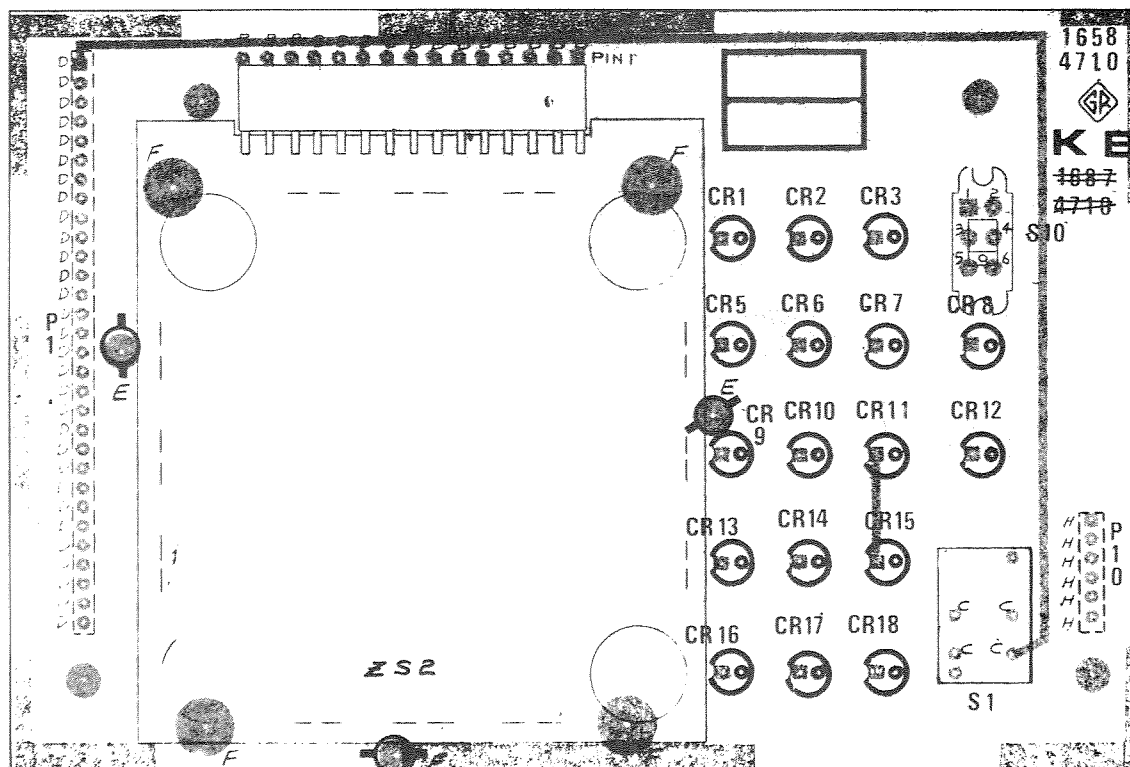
Keyboard (KB) circuit board, 1658-4710, layout.
